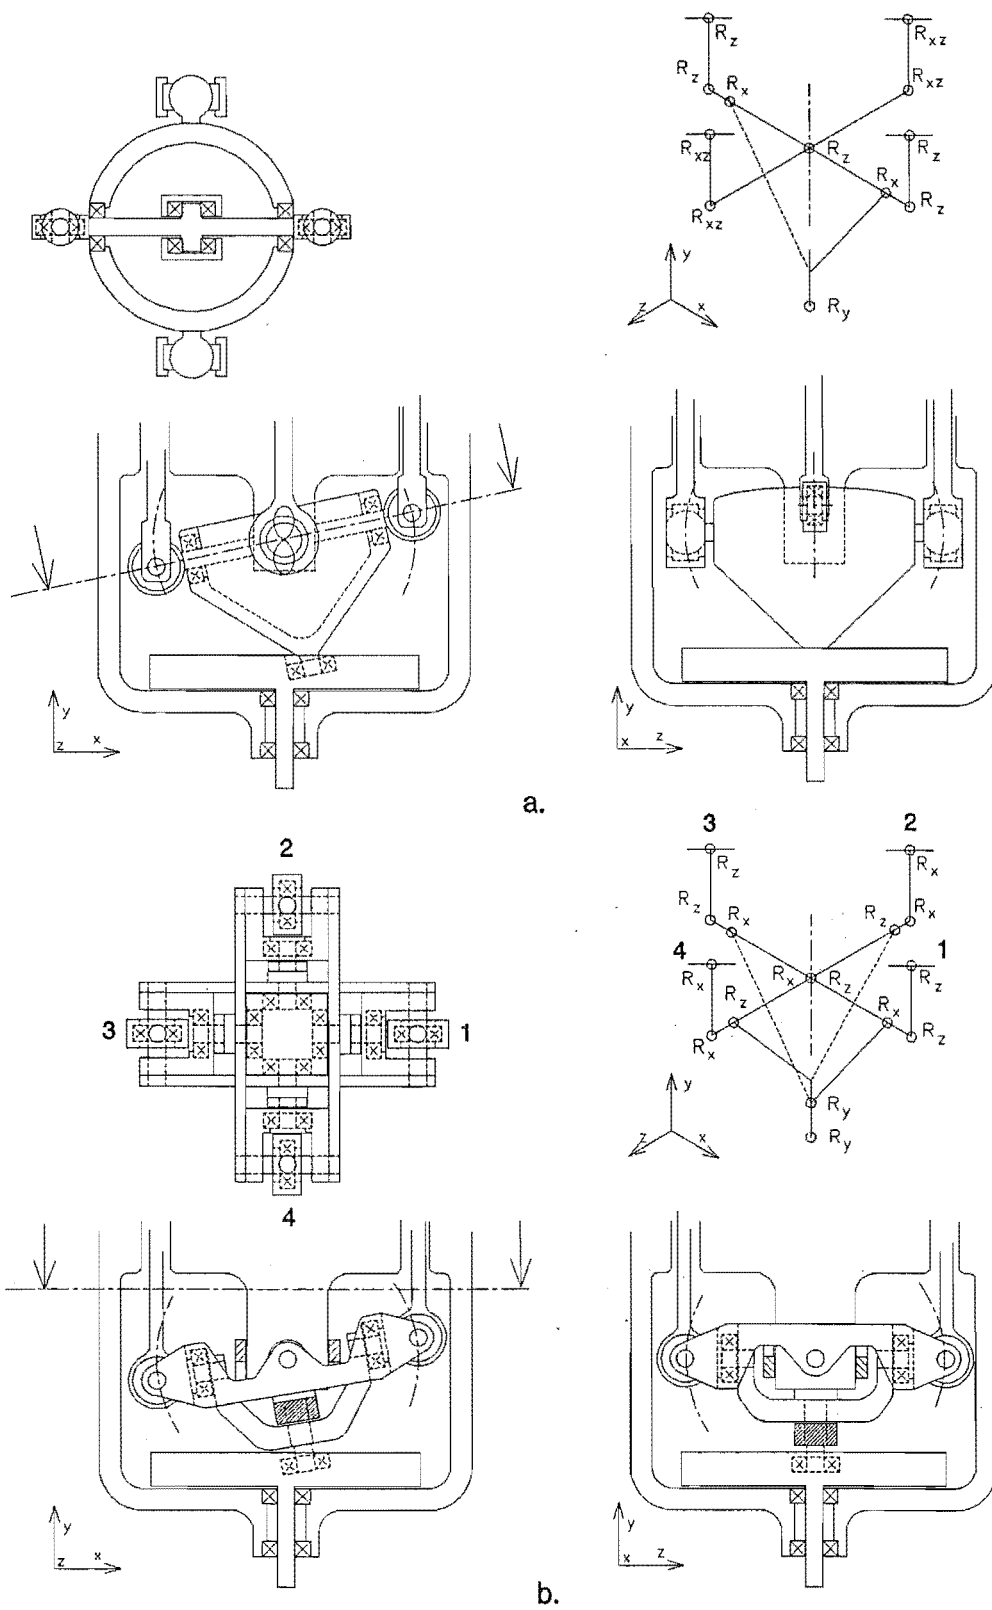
(a) Type 1 and (b) Type 2 wobble yoke layout.
